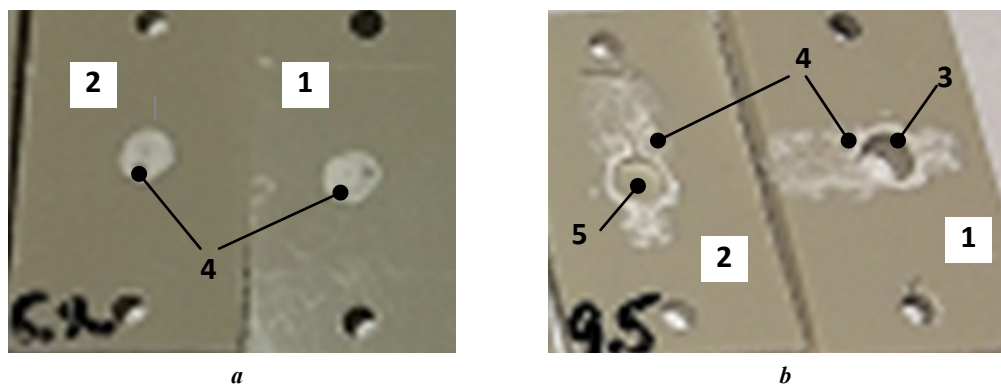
Typical view of the welded joint fracture surface after separation of the plates from each other:
